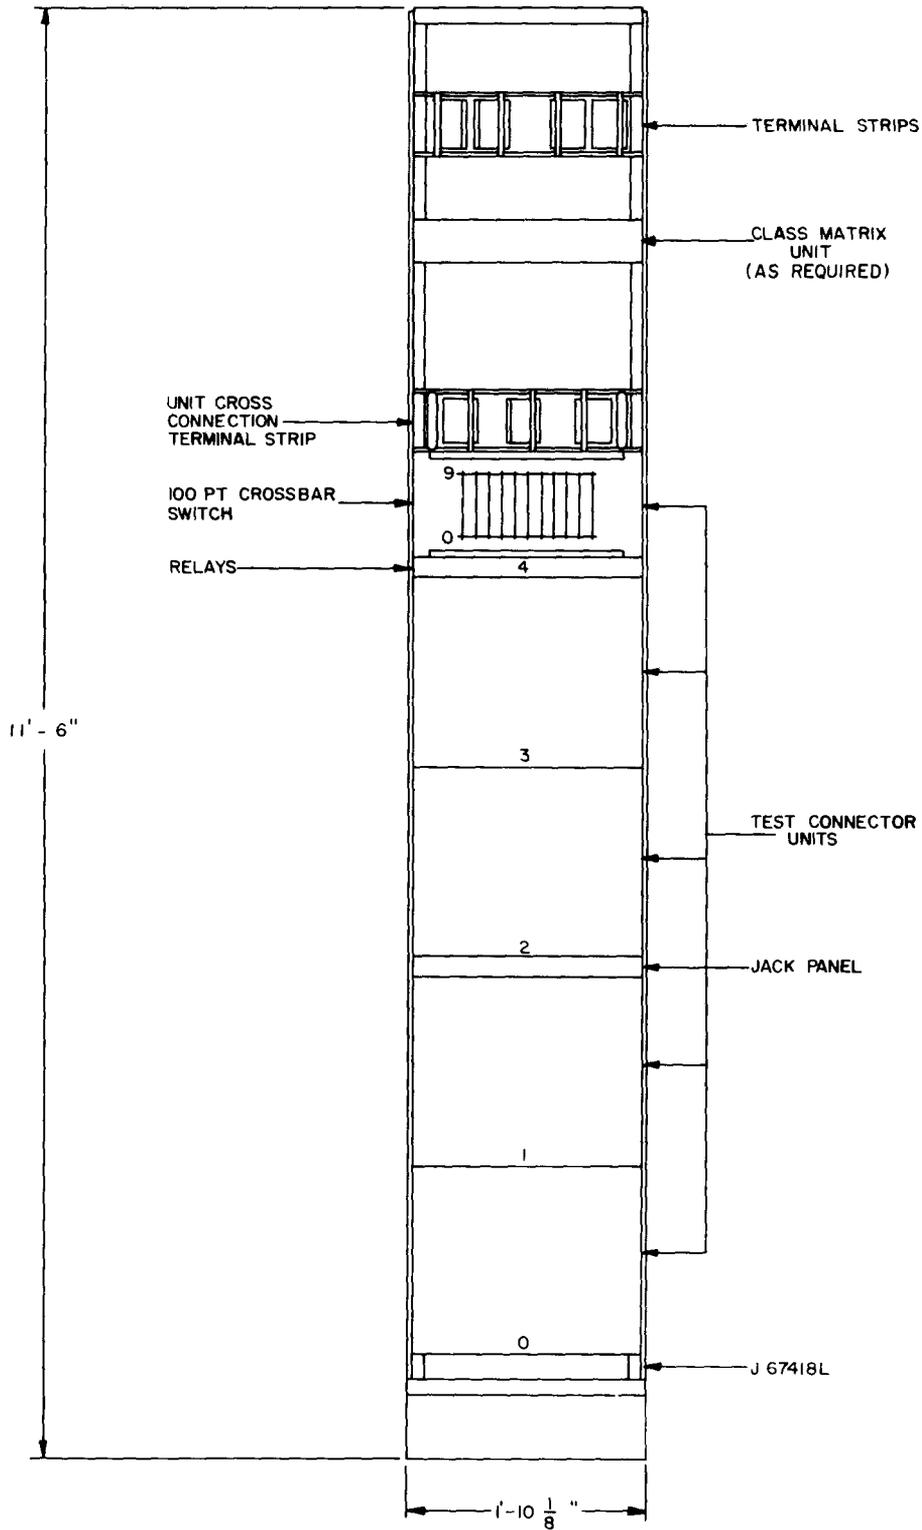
Automatic Outgoing Toll Connecting Trunk Test Connector Frame
